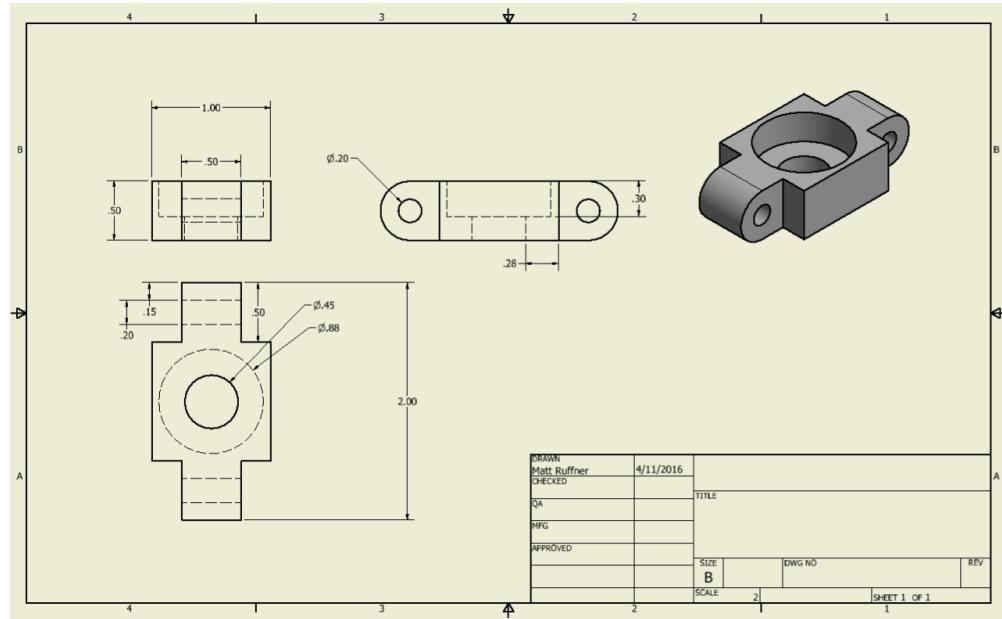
Top Shaft Anchor. Drawing showing top mounting point of stationary shaft to ball bearing to steel rods. Dimensions in inches.
